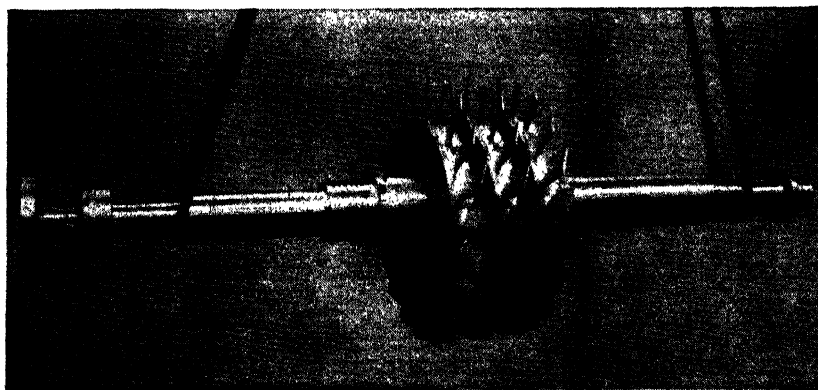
Latest Type of Blading on Escher Wyss Turbine.
